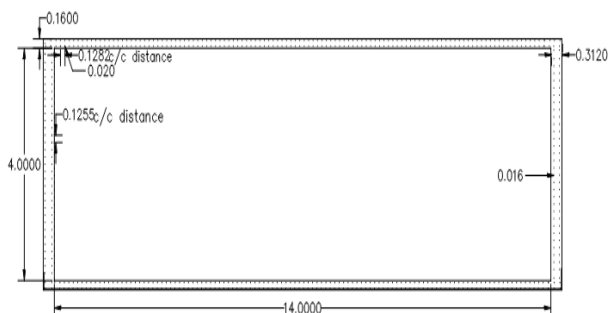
SECTIONAL FRONT VIEW OF STORAGE TANK
